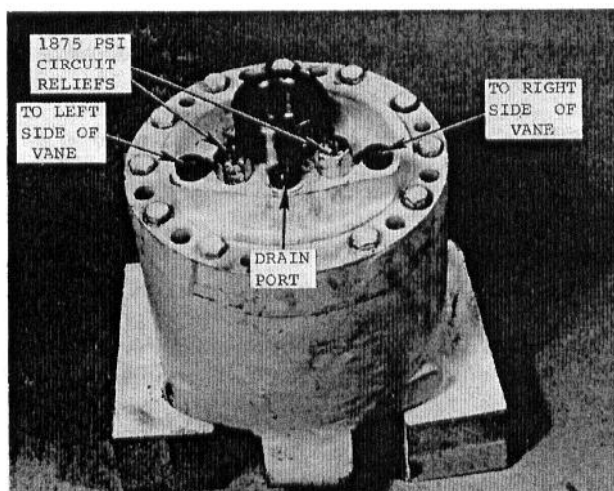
Location of Circuit Reliefs in Rotary Cylinder MF Part No. 708 714 M92 (For MF 52A)
